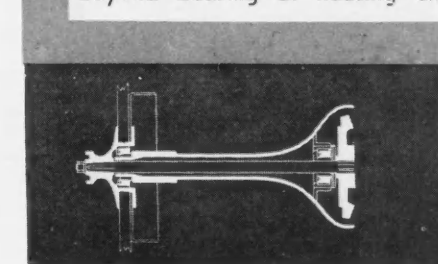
Housing and axle shaft divide job of supporting and holding wheel in a 3/4-floating axle. A bearing carries part of the load
